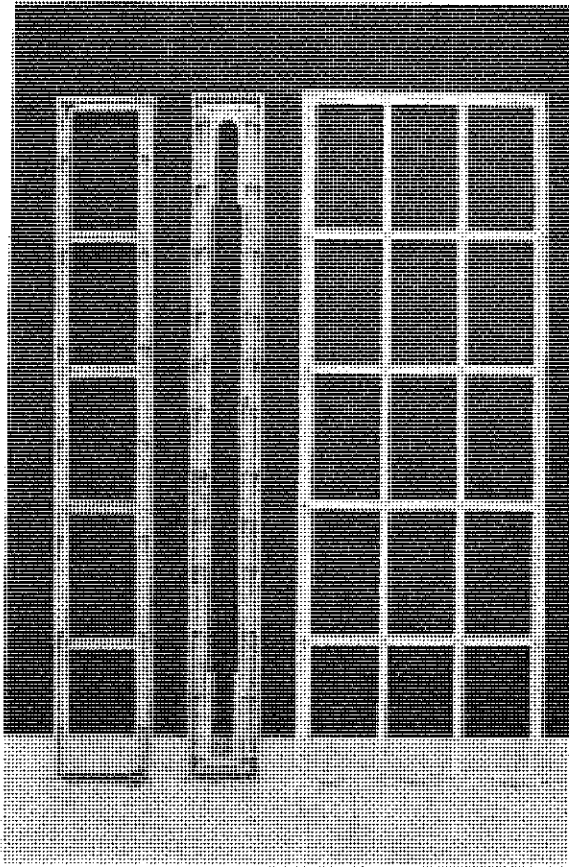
Three mating inserts of fixtures shown in Figs. 1, 2, and 3.
